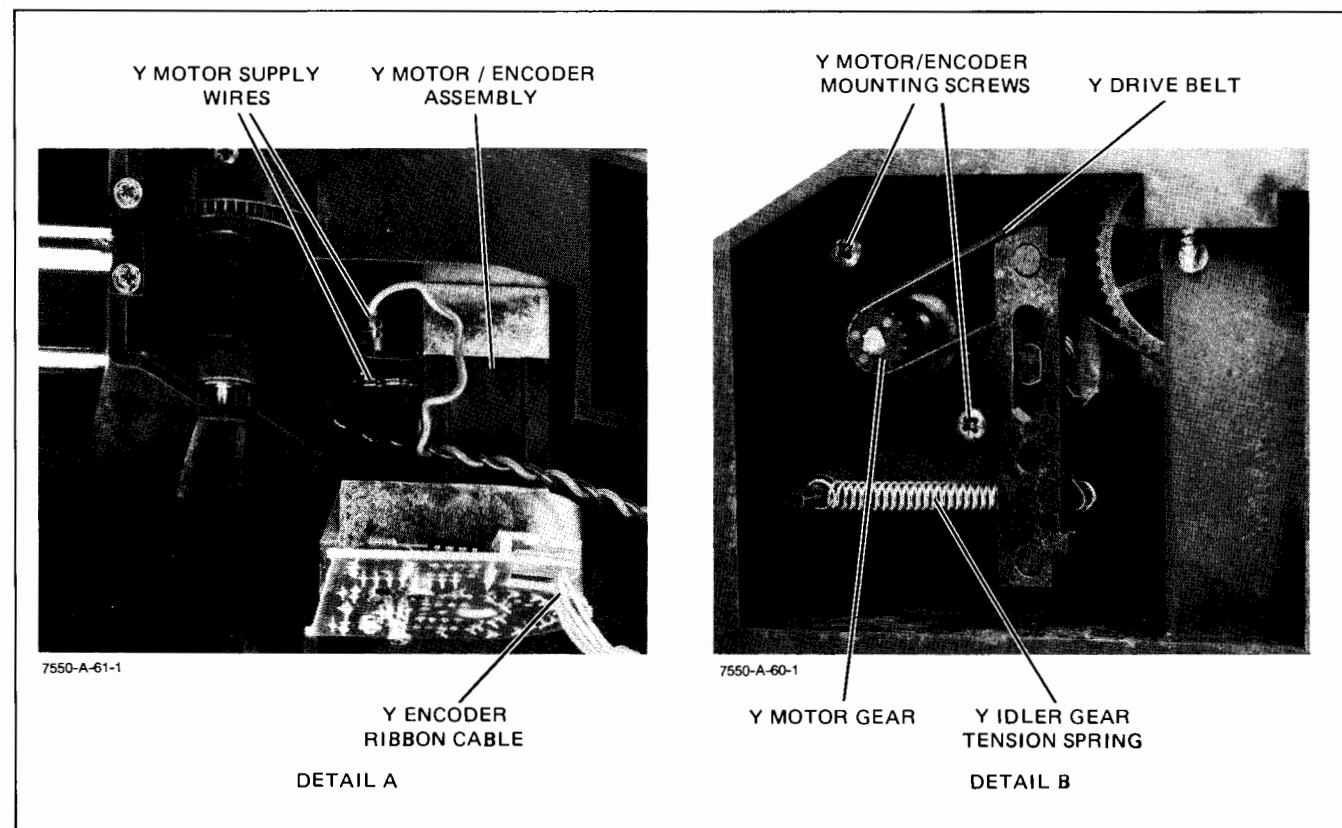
Y-Drive (Pen Carriage) Motor/Encoder Removal
